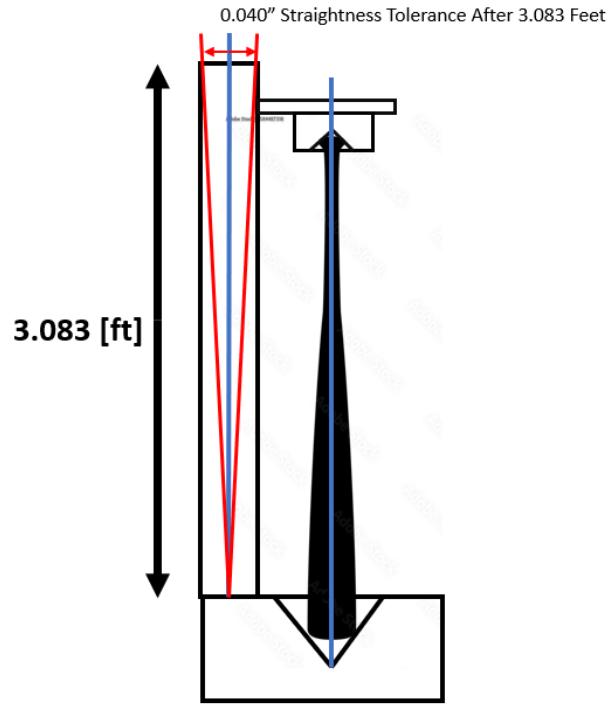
Diagram of straightness tolerance propagation as you move down aluminum extrusion long enough for baseball bat centering fixture.
